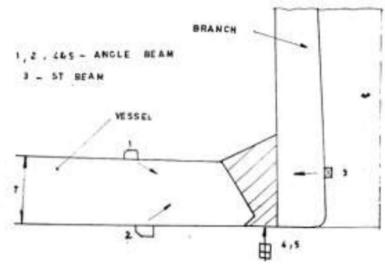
SCANNING DIRECTION- FULL PENETRATION CORNER WELD (SET-THROUGH)
